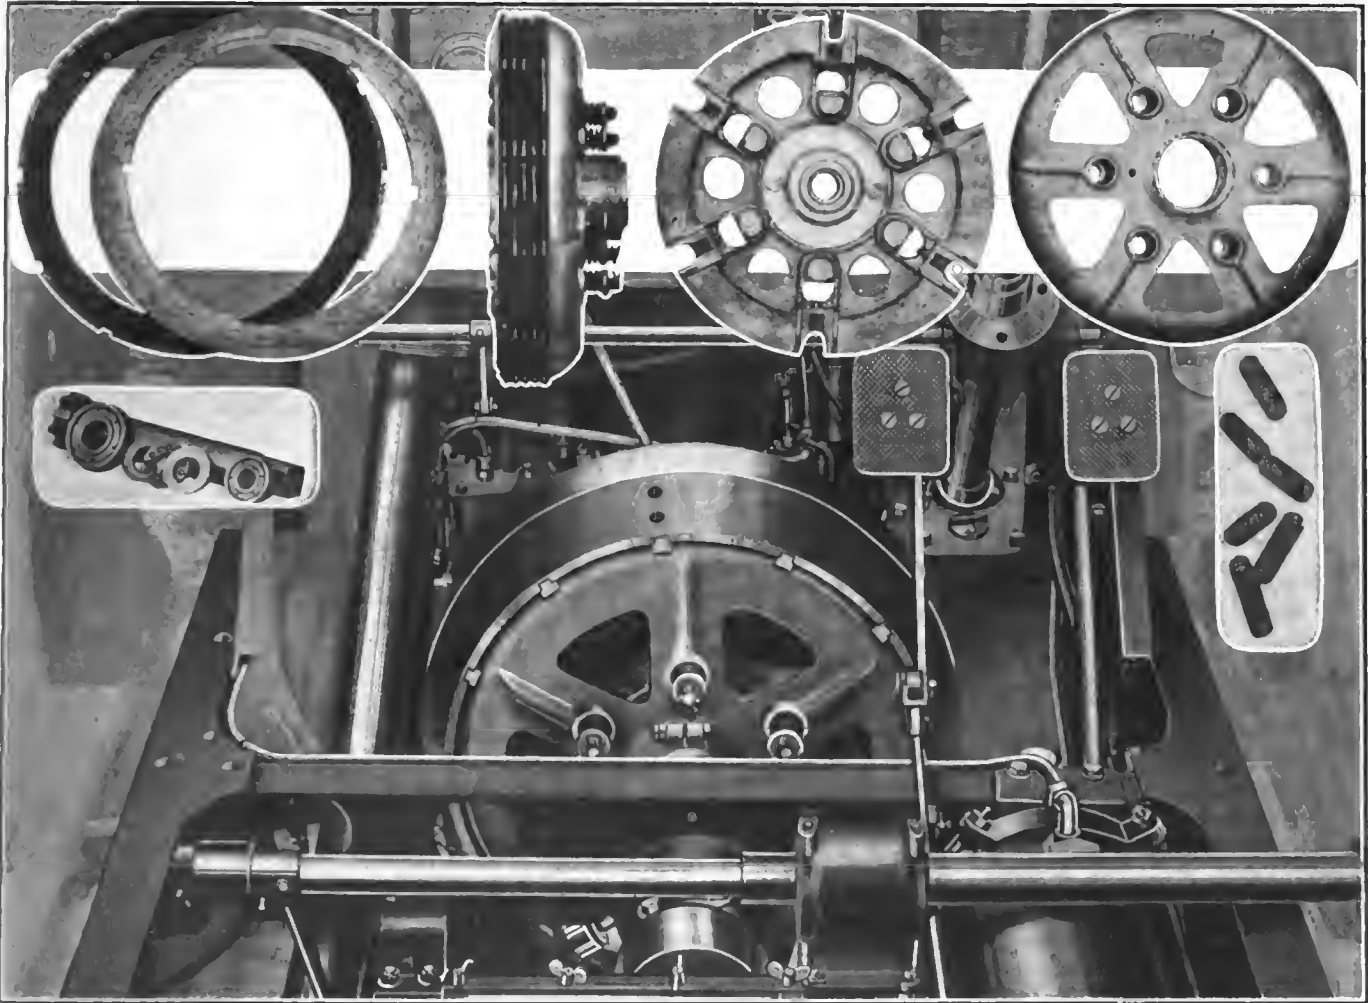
Details of design and construction of the Stearns dry plate clutch, showing strength and stability throughout
